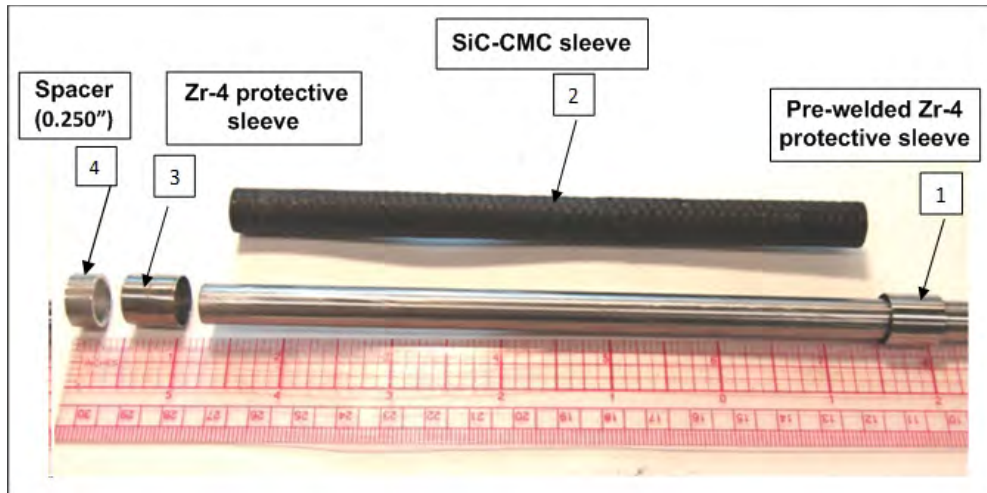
Figure showing all the parts used for the assembly of the HWCF mock-up samples.
